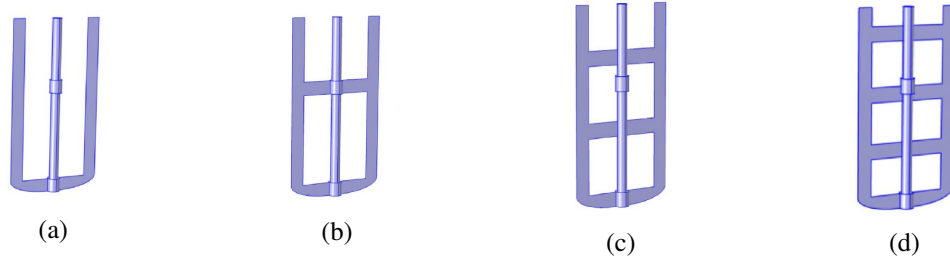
Tested impellers used by [Benhanifa et al. \(2022\)](#) (a) Classical anchor impeller; (b) Anchor impeller with added horizontal arm blade; (c) Anchor impeller with two blades; (d) Anchor impeller with three blades.
